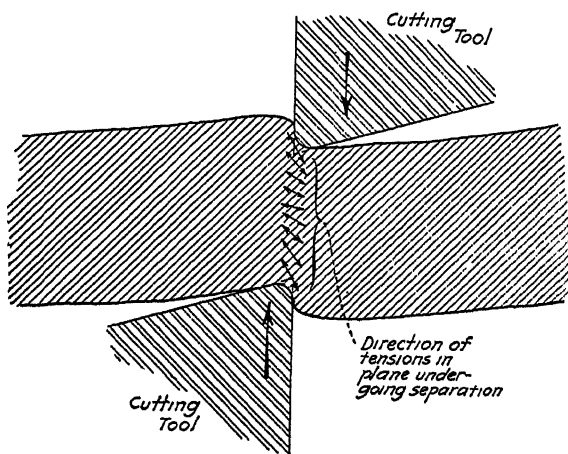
SHEARING METAL BAR IN COMMERCIAL MACHINE.
